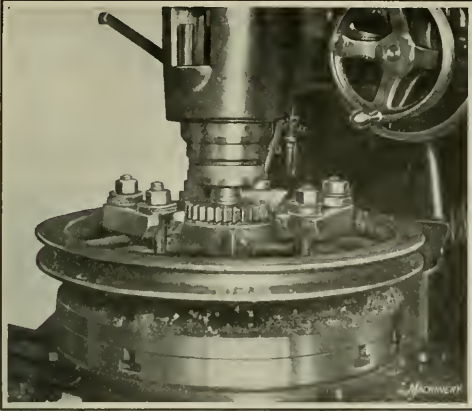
Straddle-milling the Face of the Hub of a Crane Sheave
